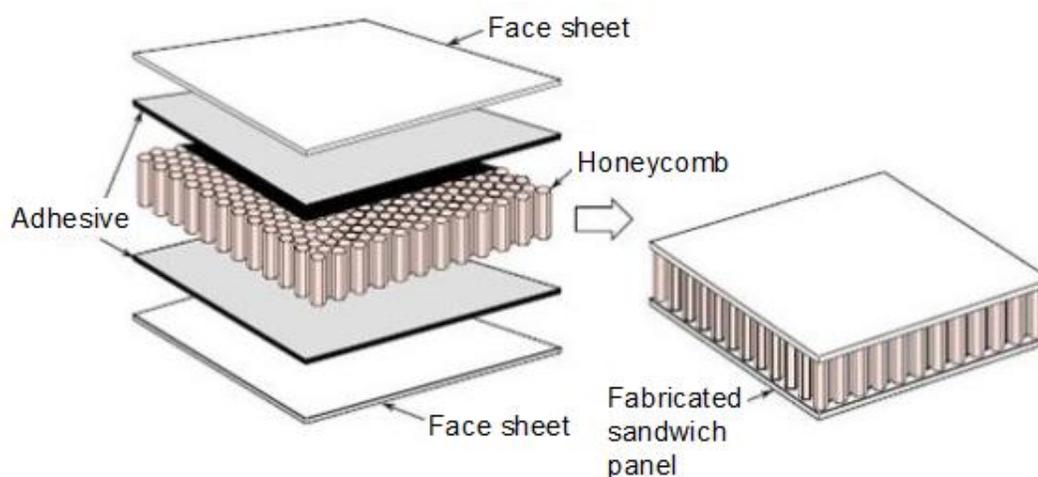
The configuration of the honeycomb paperboard faced with thin MDFs (face sheets)
